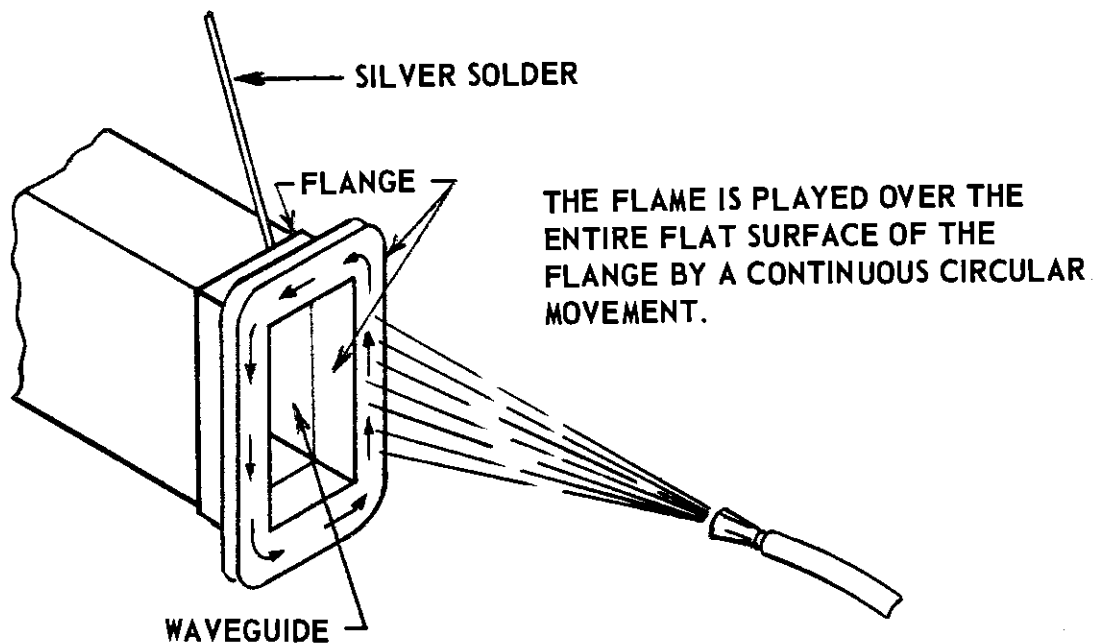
Silver Soldering Waveguide and Flange - Butt Design
